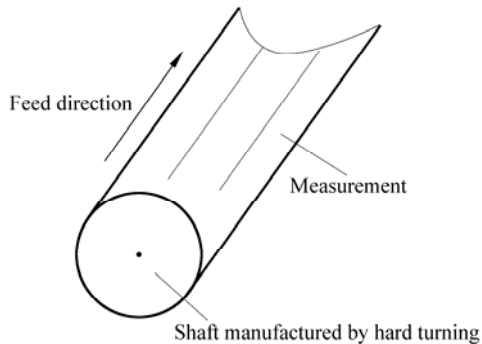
Measuring the profile of the shaft manufactured by hard turning
